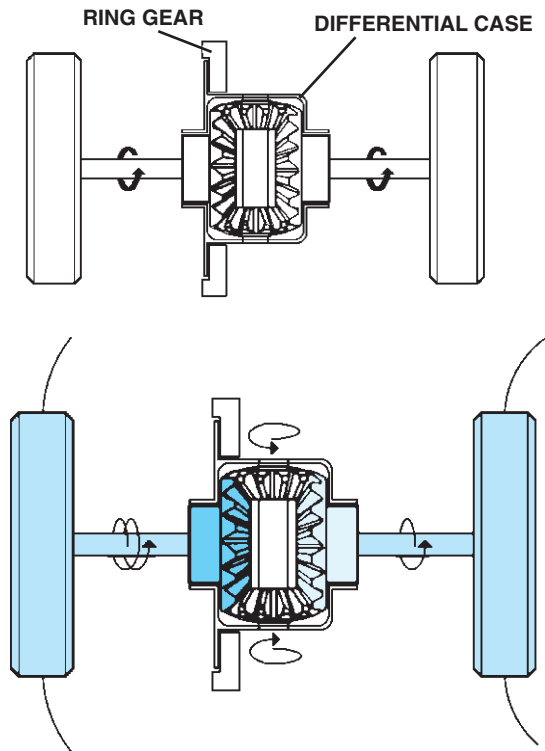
An equal load from each side gear will keep the differential pinion gears from rotating on their shaft, and both side gears will be driven at the same speed. If one wheel slows, the differential pinions will rotate on their shaft and drive the other side gear and wheel at an increased speed.
